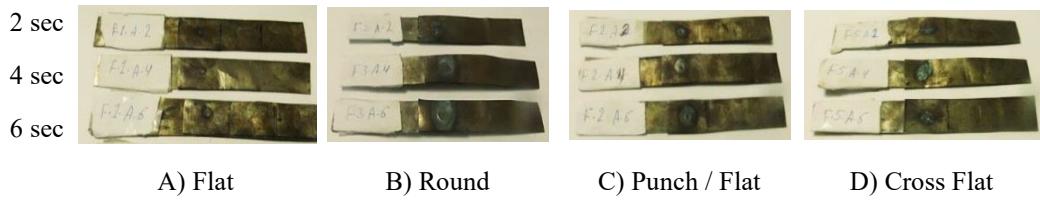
The welding specimens obtained using welding times of 2, 4, 6 sec
